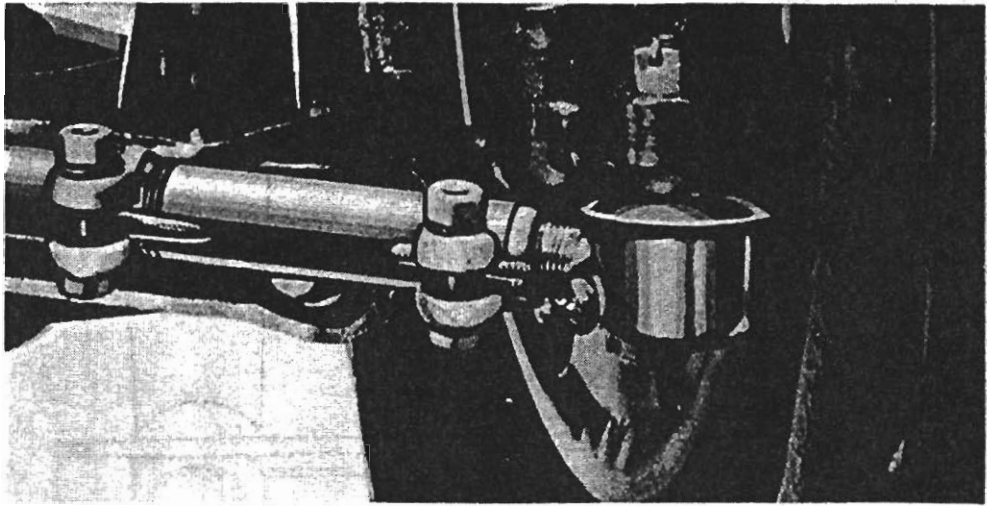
Check Each Cross Tube Outer Ball Socket for Being Centralized Around the Ball.
